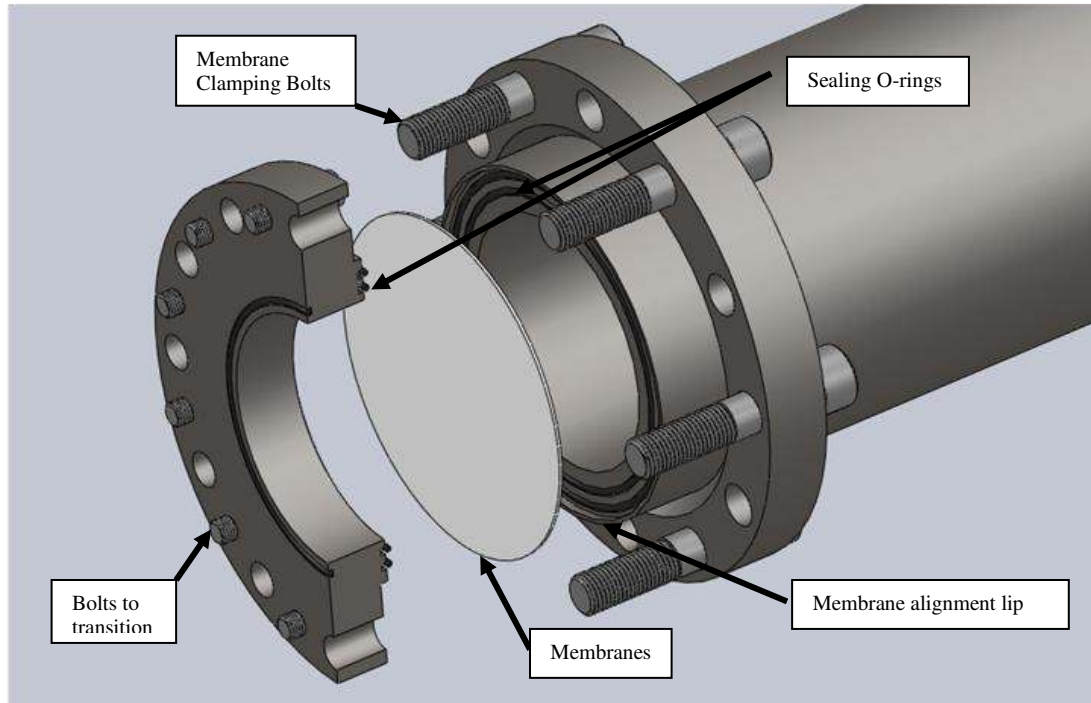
Partial cross section of the membrane clamping device for the 8 inch driver. Up to twelve 1.25" dia. bolts are used to clamp membranes together while four O-rings are used to seal in pressure and prevent the membranes from slipping.
